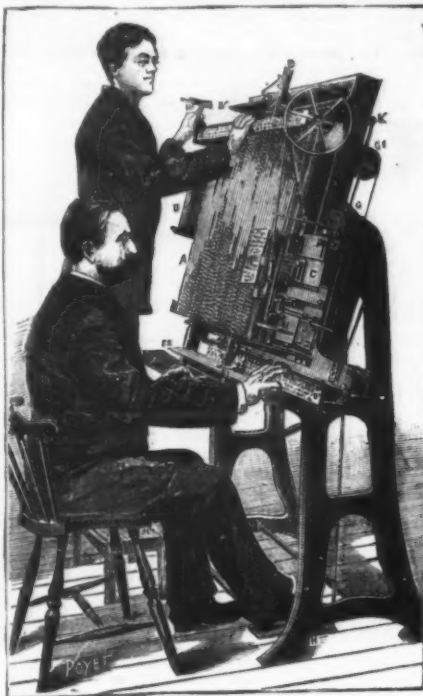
NEW COMPOSING MACHINE. (General View.)
